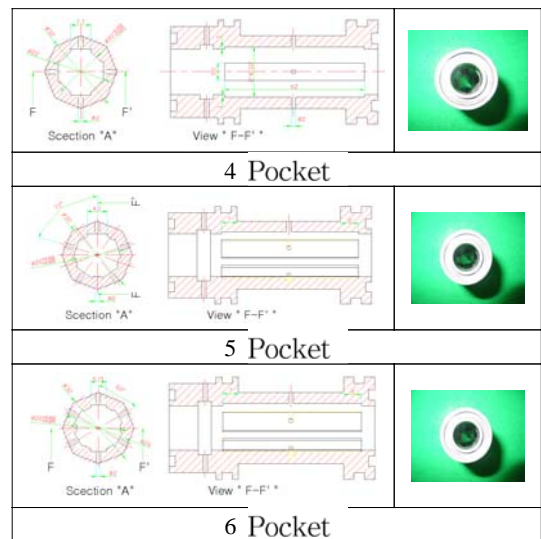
Rod Bearing (4, 5, 6 Pockets)
